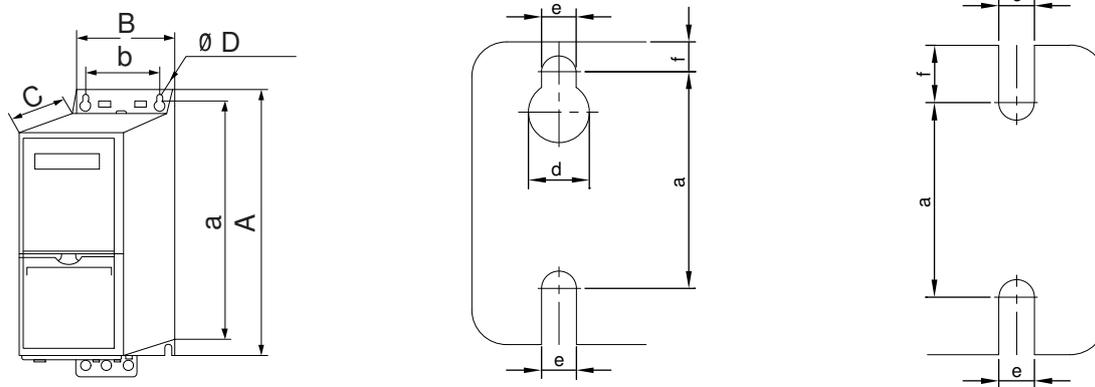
Dimensions, Enclosure Sizes H1–H5 & H11–H12
